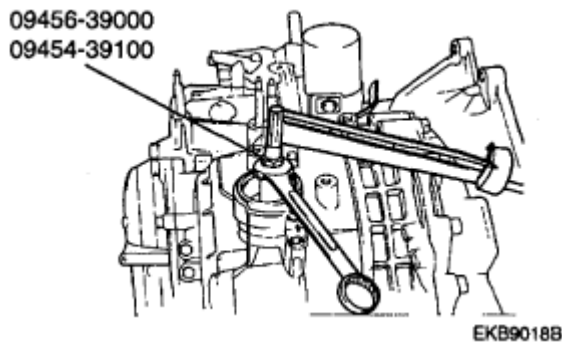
Identifying Overdrive Clutch Spring Retainer
